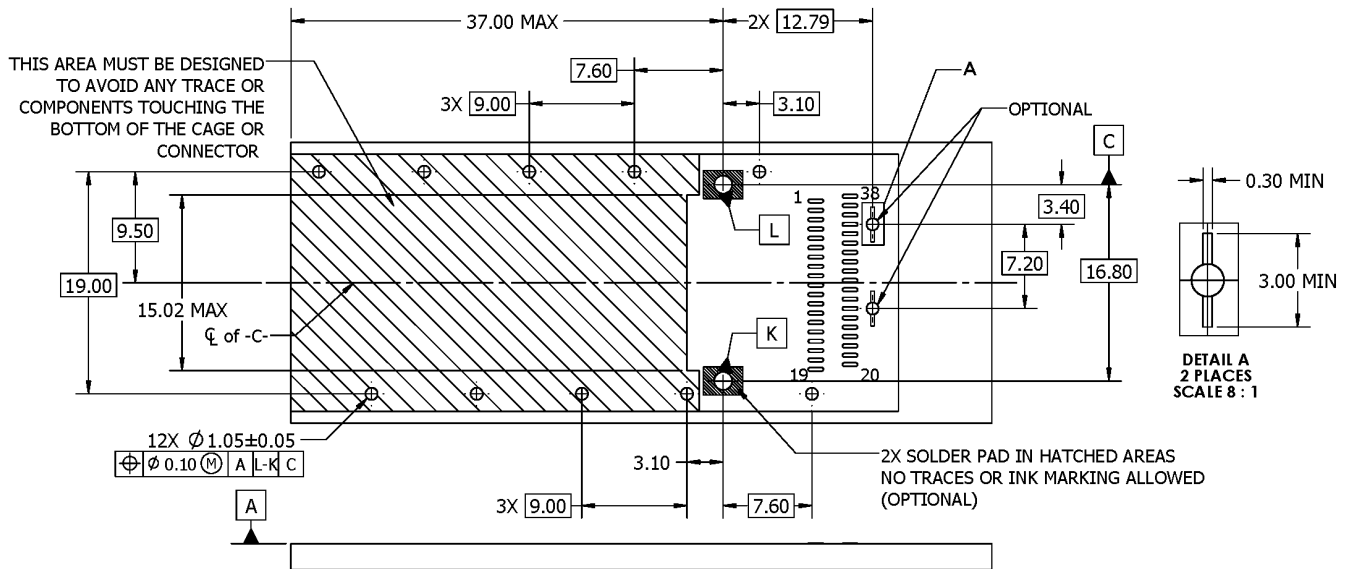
PCB Layout for QSFP112 1x1 Connector (Footprint Styles A & B)
